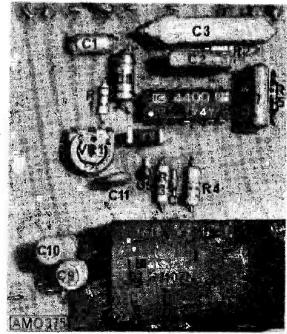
Layout of the components on the Stereo Decoder Board.
